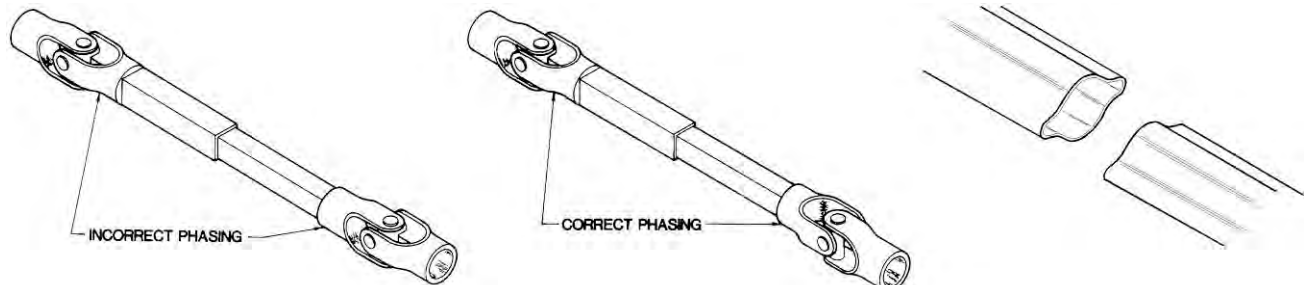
With older square telescopic drive shafts, it was possible to connect the shaft so that the Cardan joints were out of phase (rotated 90° to each other), creating a vibration problem (left). Modern drive shafts (far right) are designed so that the telescopic shaft will only fit together by turning the sections in increments of 180°, ensuring the joints are always in phase.
